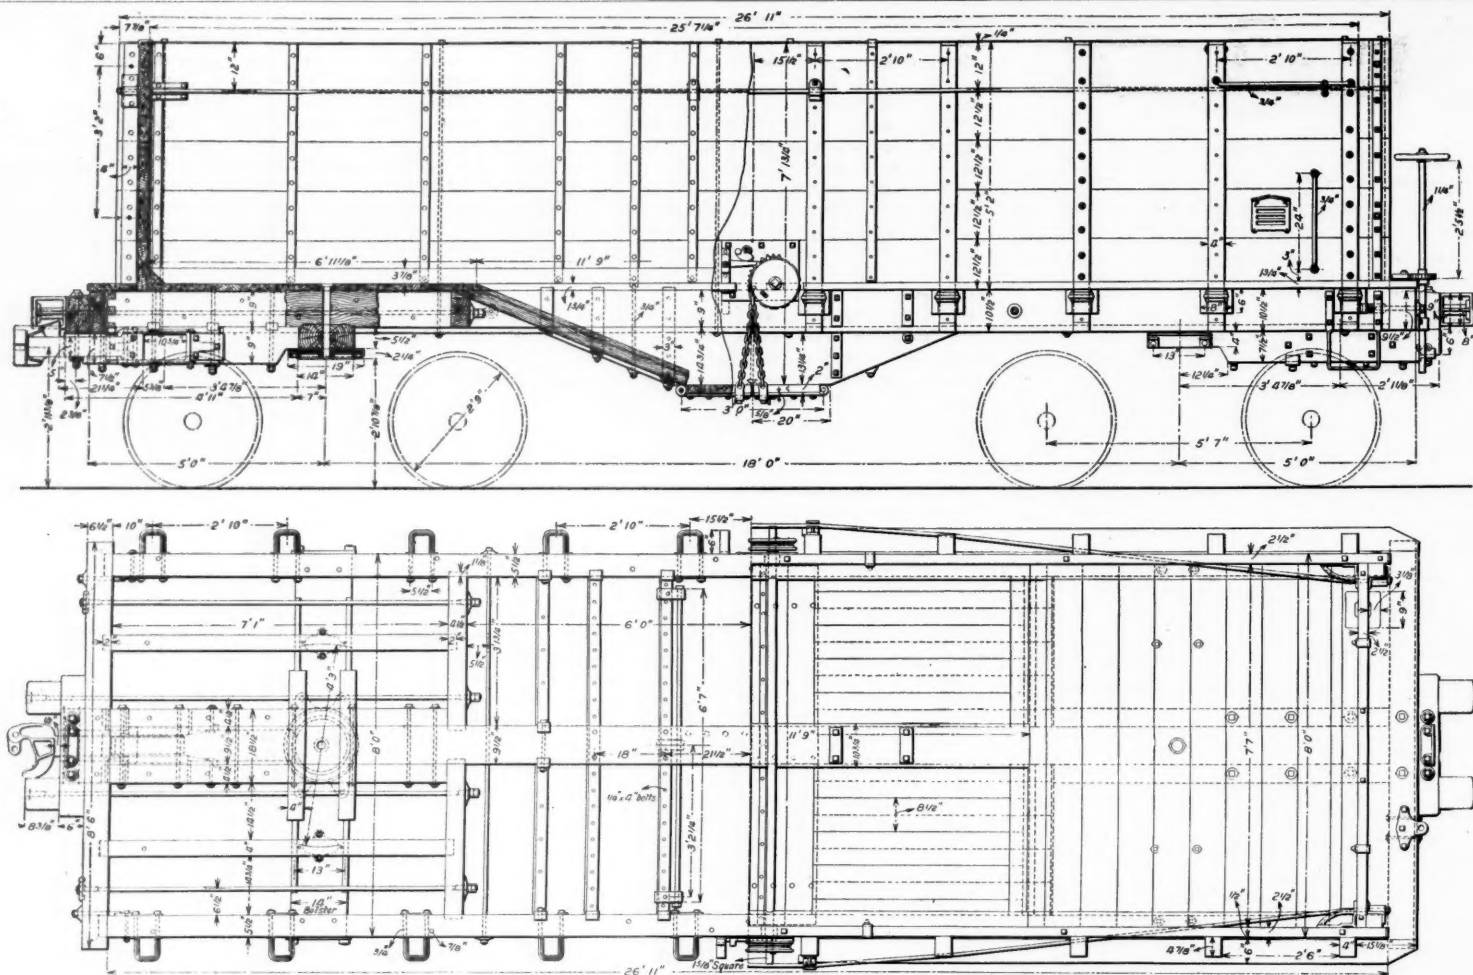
Elevation and Plan of 60,000-lb. Coal Car for the Southern Railway.
